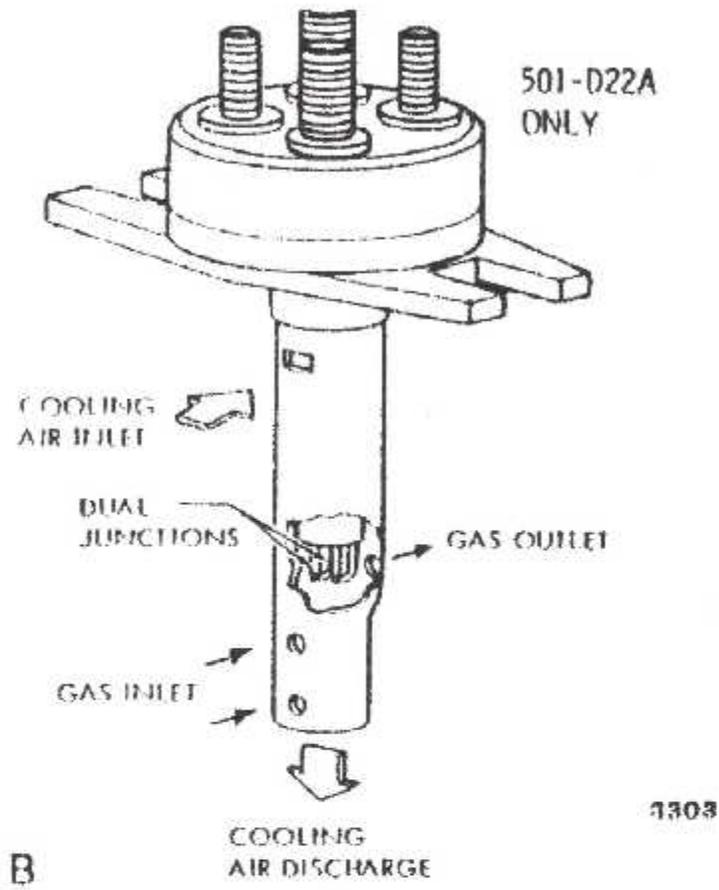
(A-B) THERMOCOUPLE ASSEMBLY
